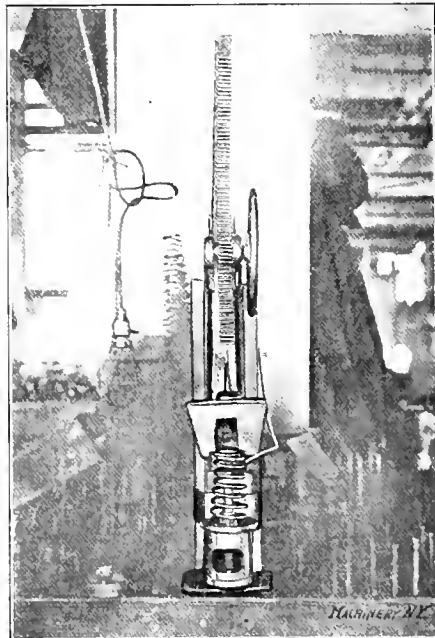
Device for Compressing Valve Springs when Assembling Cages
